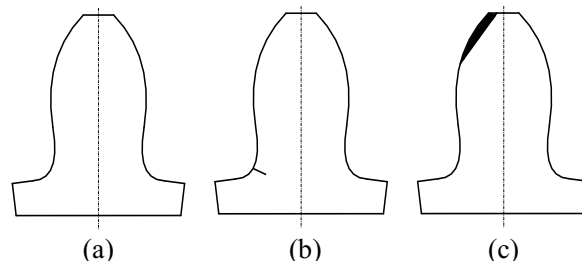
Tested gear conditions: (a) healthy gears; (b) cracked gears; (c) chipped gears.
